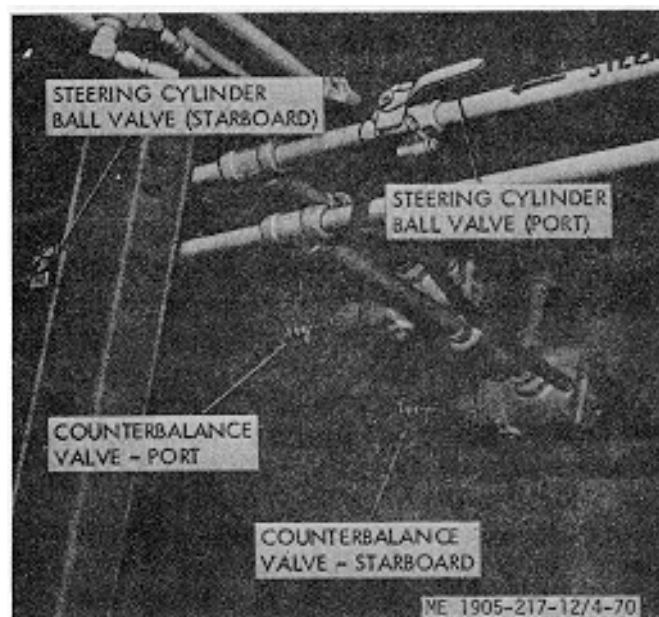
Counterbalance valves, steering system, hull numbers 8520 thru 8560 and 8580 thru 861R.
